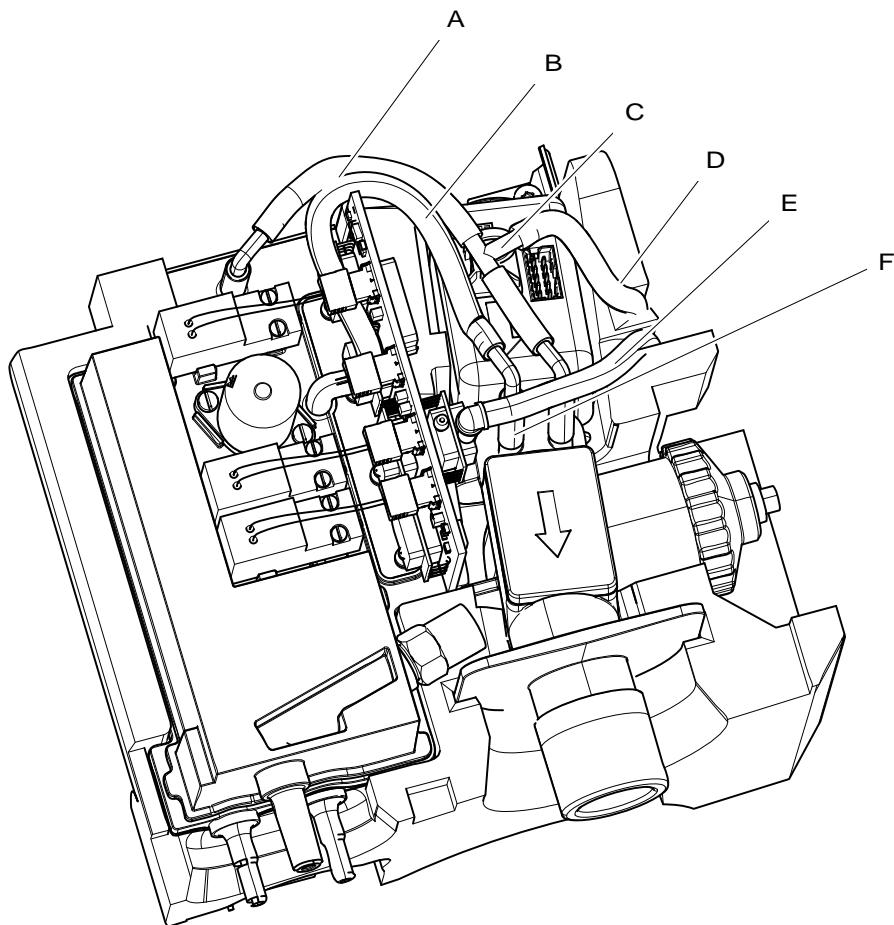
Pressure sensor assembly (HAMILTON-C1 SN3643-6000)
